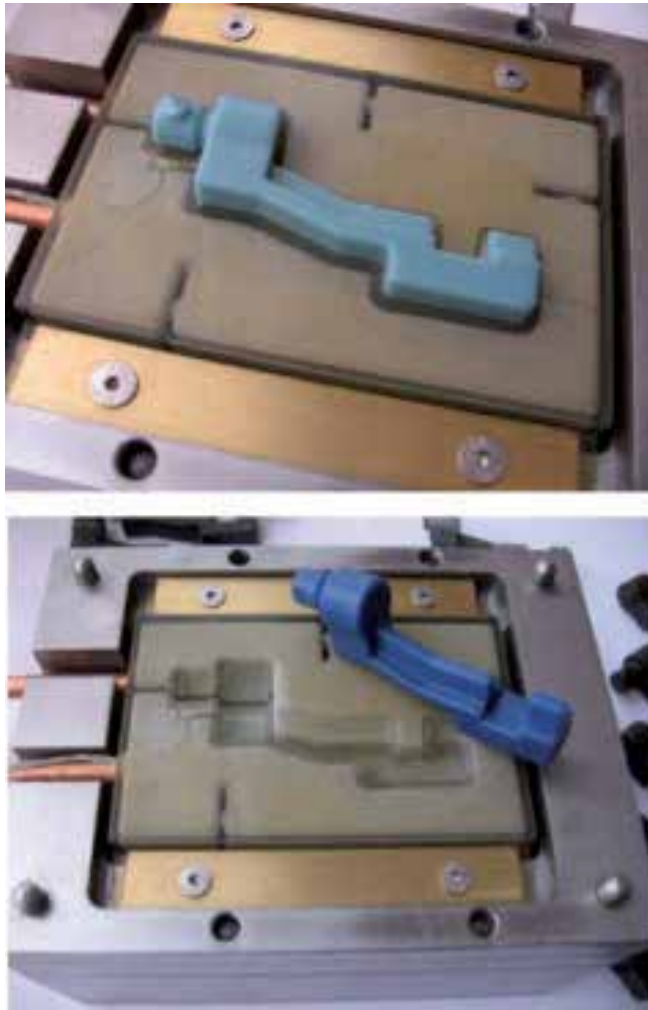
Wax moulding of Peugeot engine gearbox shift fork
